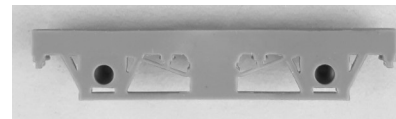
The tabs above the solebar have been overfolded i.e. the tab was bent 180° away from the etch line to form a double thickness. The tabs at the end of the solebar have also been overfolded. Solder the bearings and the overfolded tabs to the frame.
